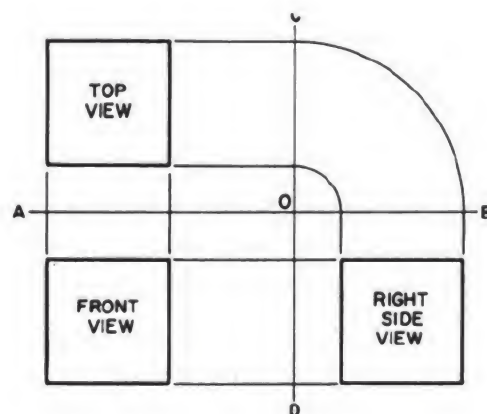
illustrates the basic principles of the method by which you would actually make the projection shown in figure 8-6. Draw a horizontal line AB and a vertical line CD,
